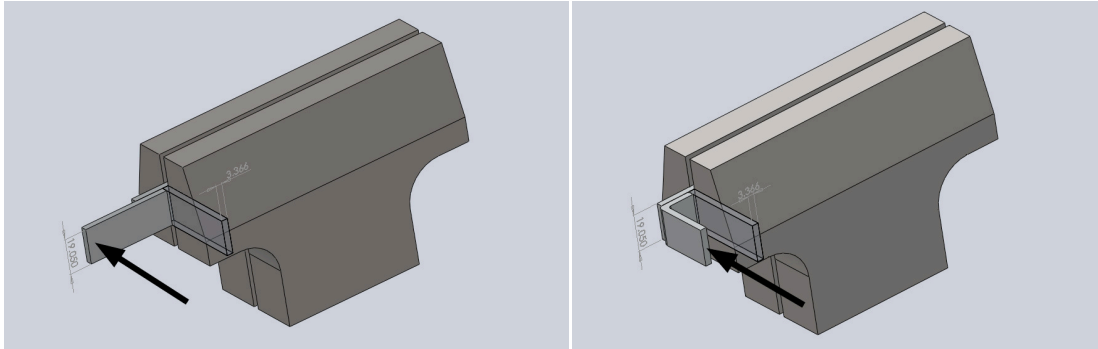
Left: Top plate of weld is clamped firmly while the bottom plate is struck in the direction of the arrow until a 90 degree bend occurs. Right: The bottom plate is now clamped firmly while the top plate is hit in the direction of the arrow until an "S" shape bend is achieved [Hendricks 2009].
